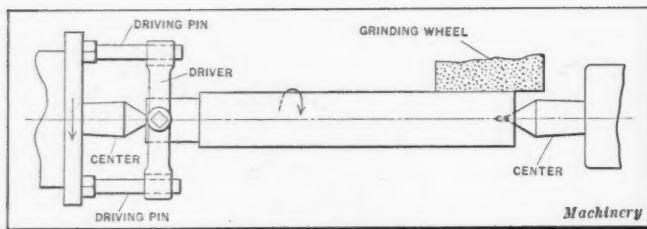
Common Method of holding and driving Centered Work when grinding externally
